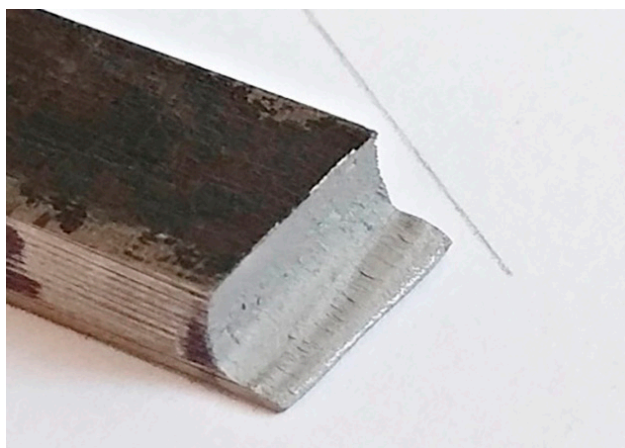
Fracture surface appearance – hardening oil (bending test)
